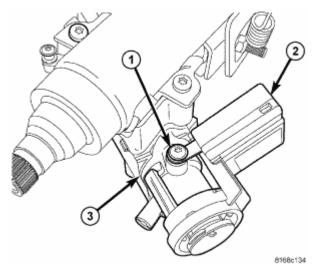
Identifying Screw, SKREEM/WCM & Lock Cylinder Housing Courtesy of CHRYSLER LLC
